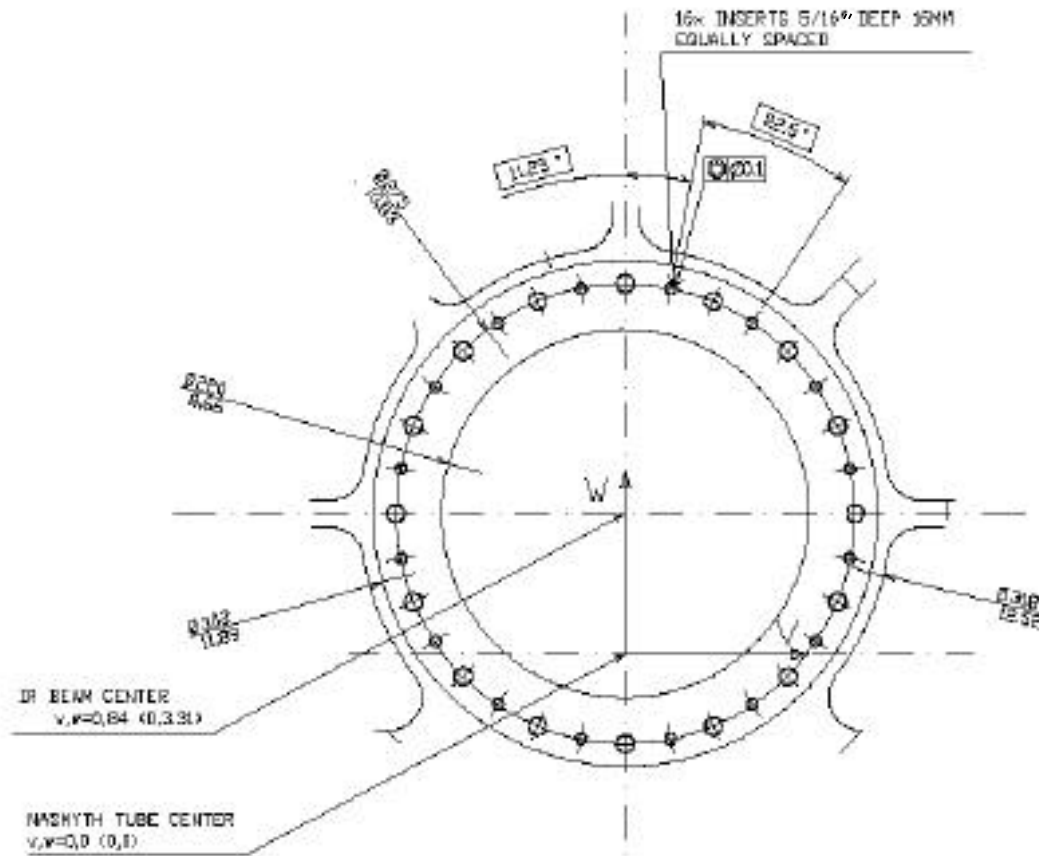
a: Pressure Coupler / Optical Window Assembly interface dimensions. Dimensions are given in mm (above) and inches (below)
